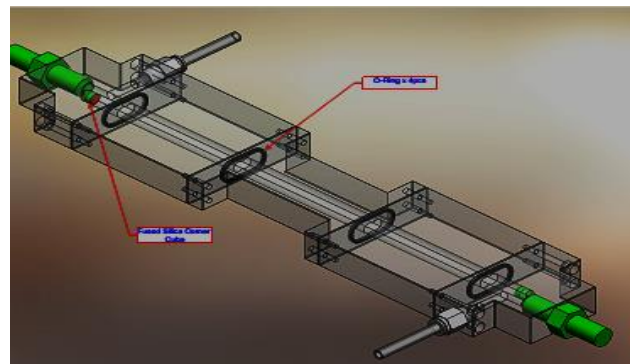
(b) Proposed ozone gas cell showing the interior of the sensor. (Fabrication drawing by[32])
